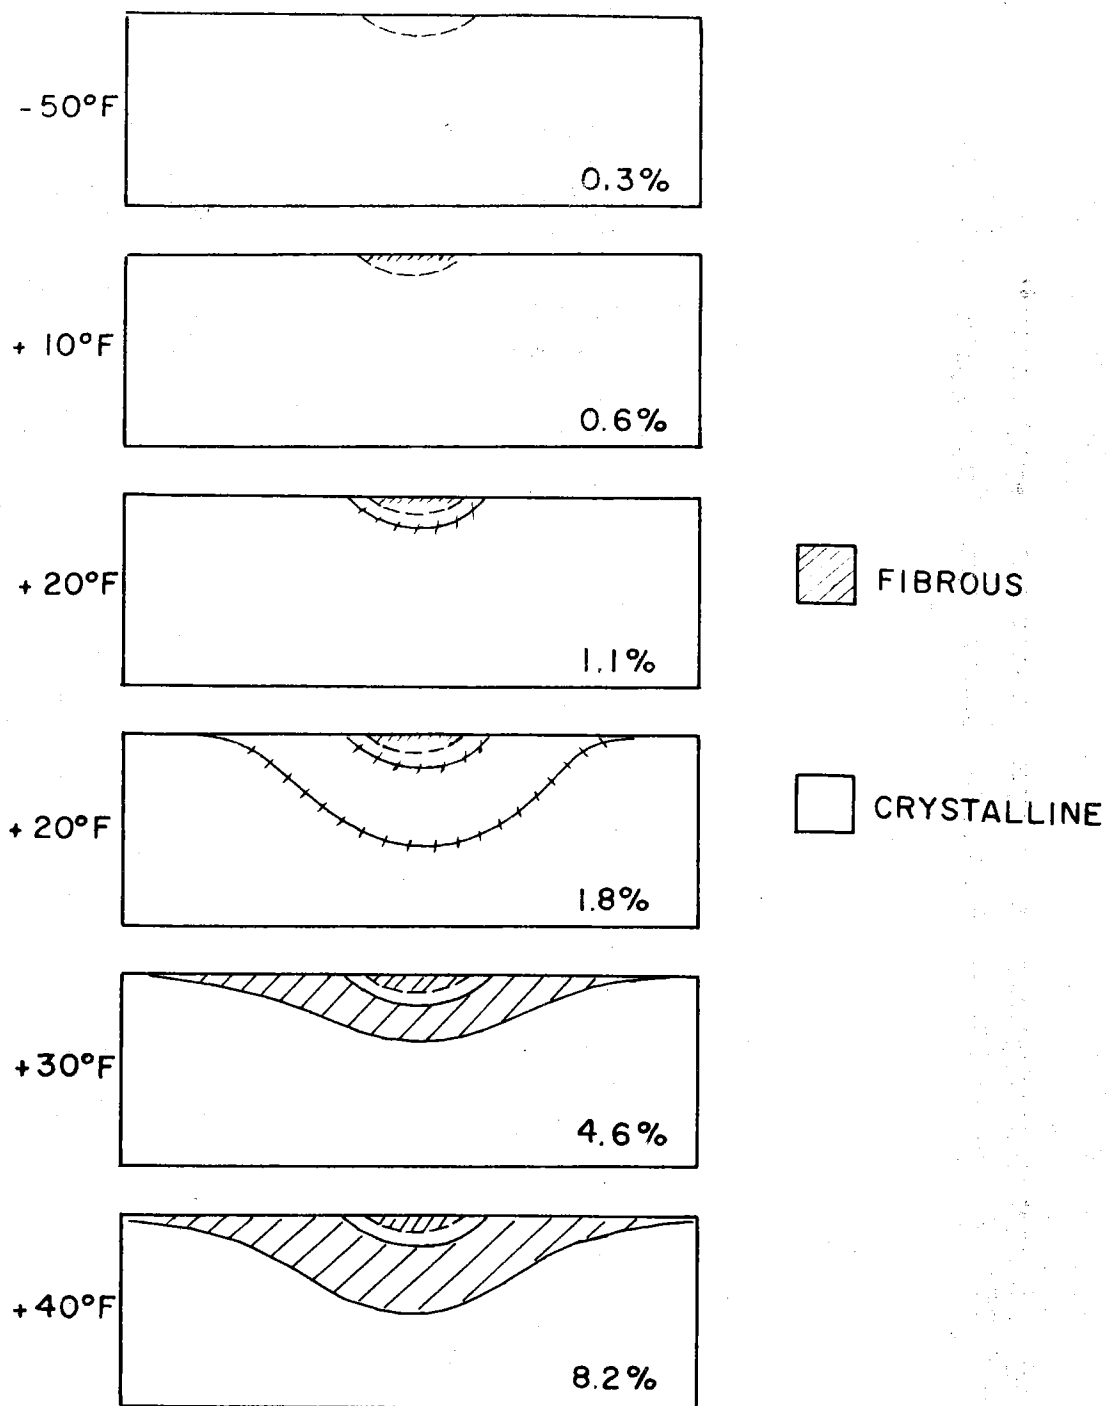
Fracture Behavior of Kinzel Specimens of A-201 Steel Welded with E6010 Electrodes.
